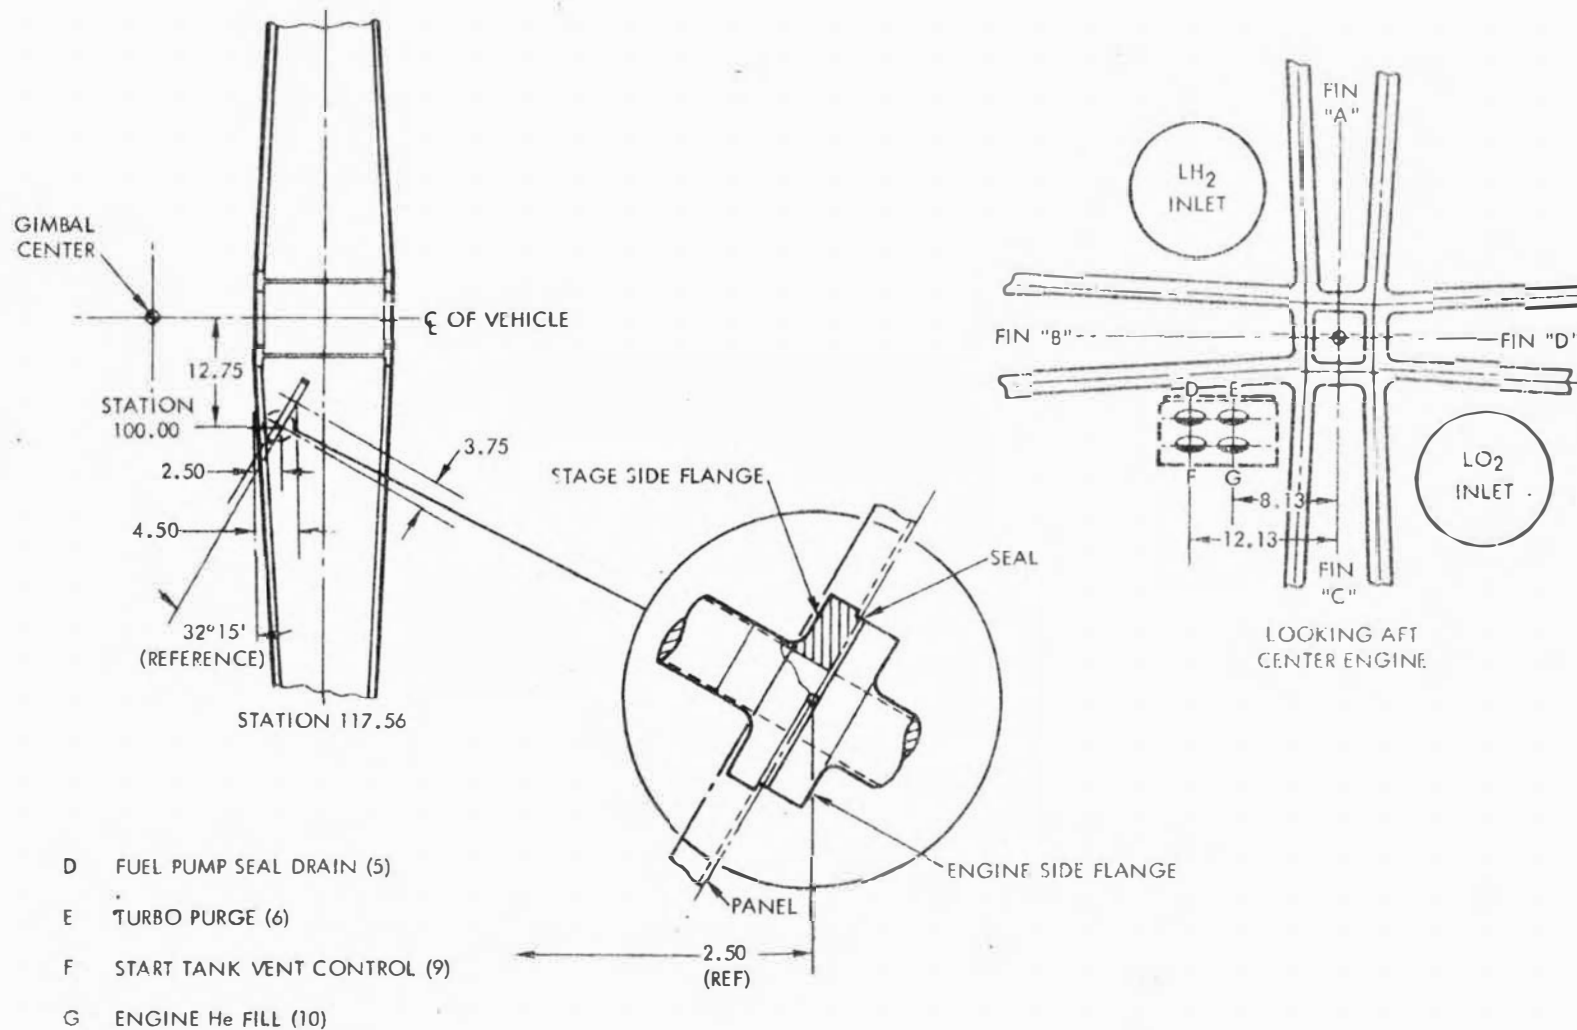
Outboard Lower Panel—J-2/S-II Center Engine Fluid Lines Interface
